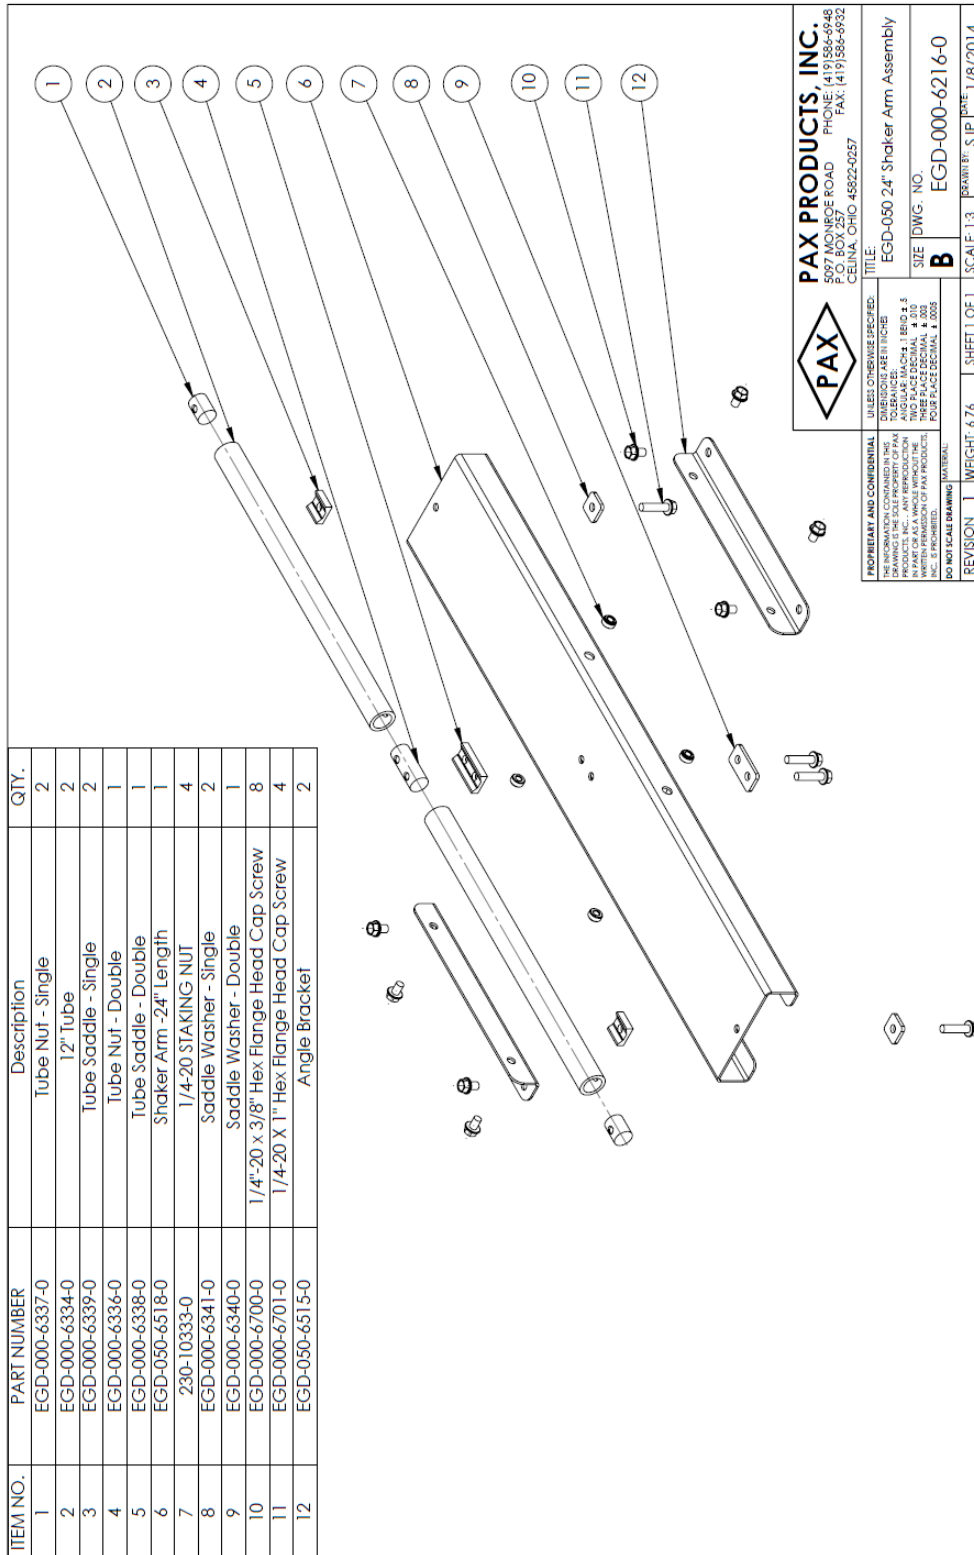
EGD-000-6216-0 EGD-050 24" SHAKER ARM ASSEMBLY
